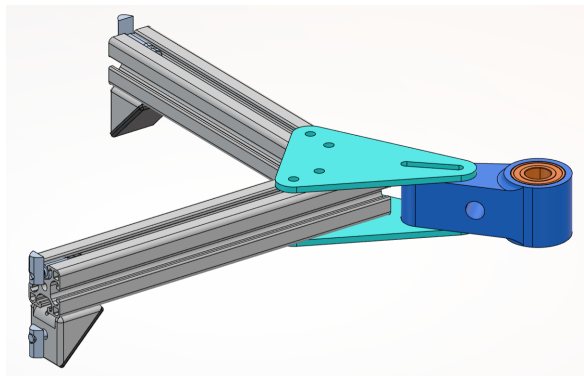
Final design of the (rotated) central cylinder assembly, showing both cylinders
